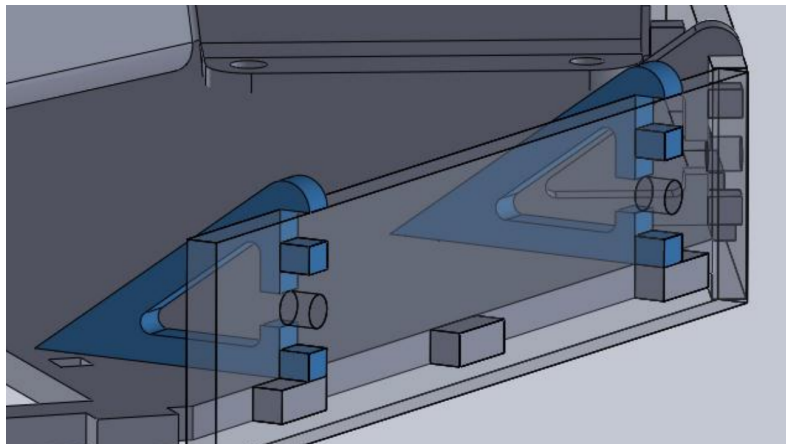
Edge of base plate design, laser-cut sheet metal is bolted together.
